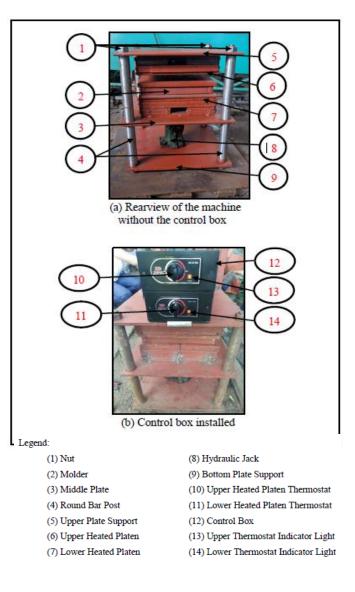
Fabricated Hot-Pressing Machine for Particle Board
